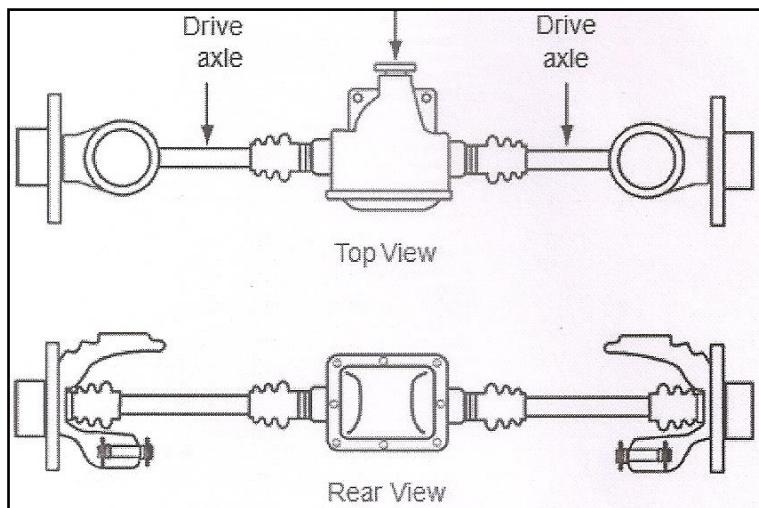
Drive axle assembly on a RWD vehicle with IRS
